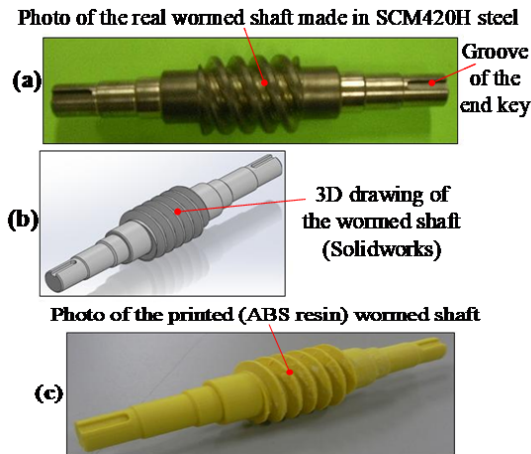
(a) Photo of the real shaft, (b) 3D drawing of the input shaft, and (c) photo of the 3D printed shaft in ABS resin, illustrating the design process of the input wormed shaft
